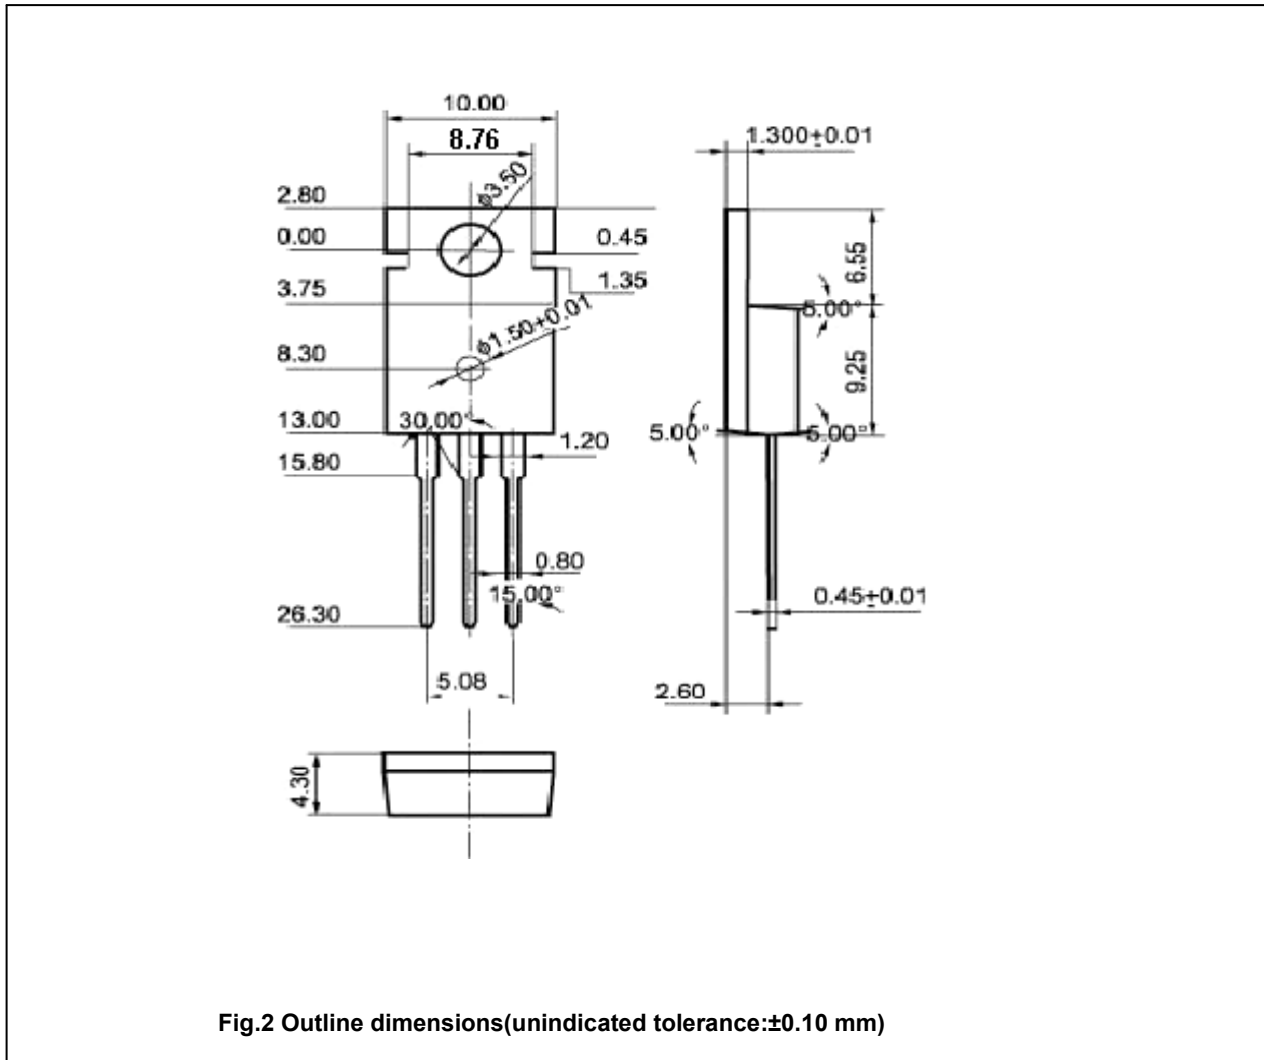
Outline dimensions(unindicated tolerance:±0.10 mm)
